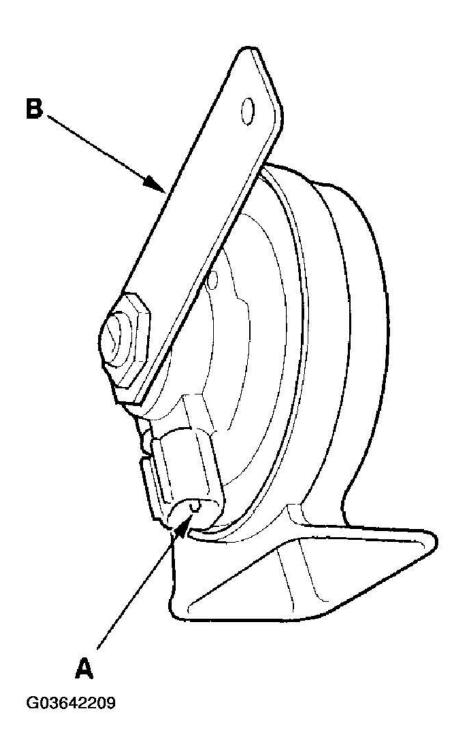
Connecting Battery Power To Terminal And Grounding To Test Horn ('03 Model) Courtesy of AMERICAN HONDA MOTOR CO., INC.
